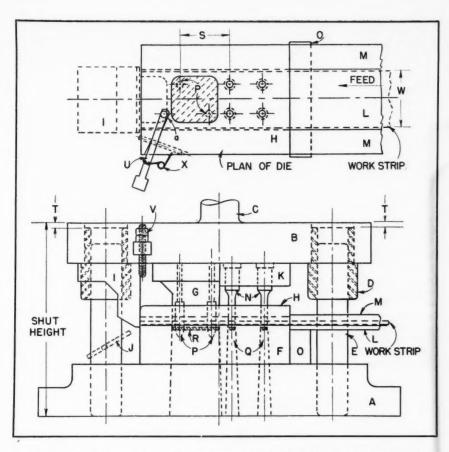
Design of a typical two-station perforating and blanking die that is provided with a scrap strip cutter.
